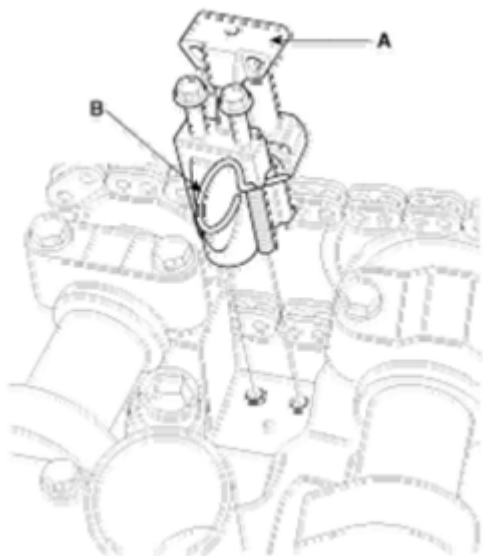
Identifying Timing Chain Auto Tensioner & Auto Tensioner Stopper Pin
